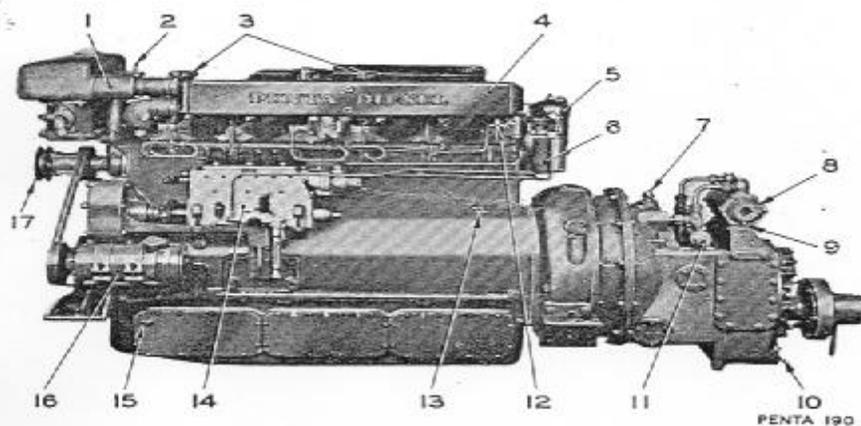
MD 96 engine with Self Changing Gear reverse gear.
